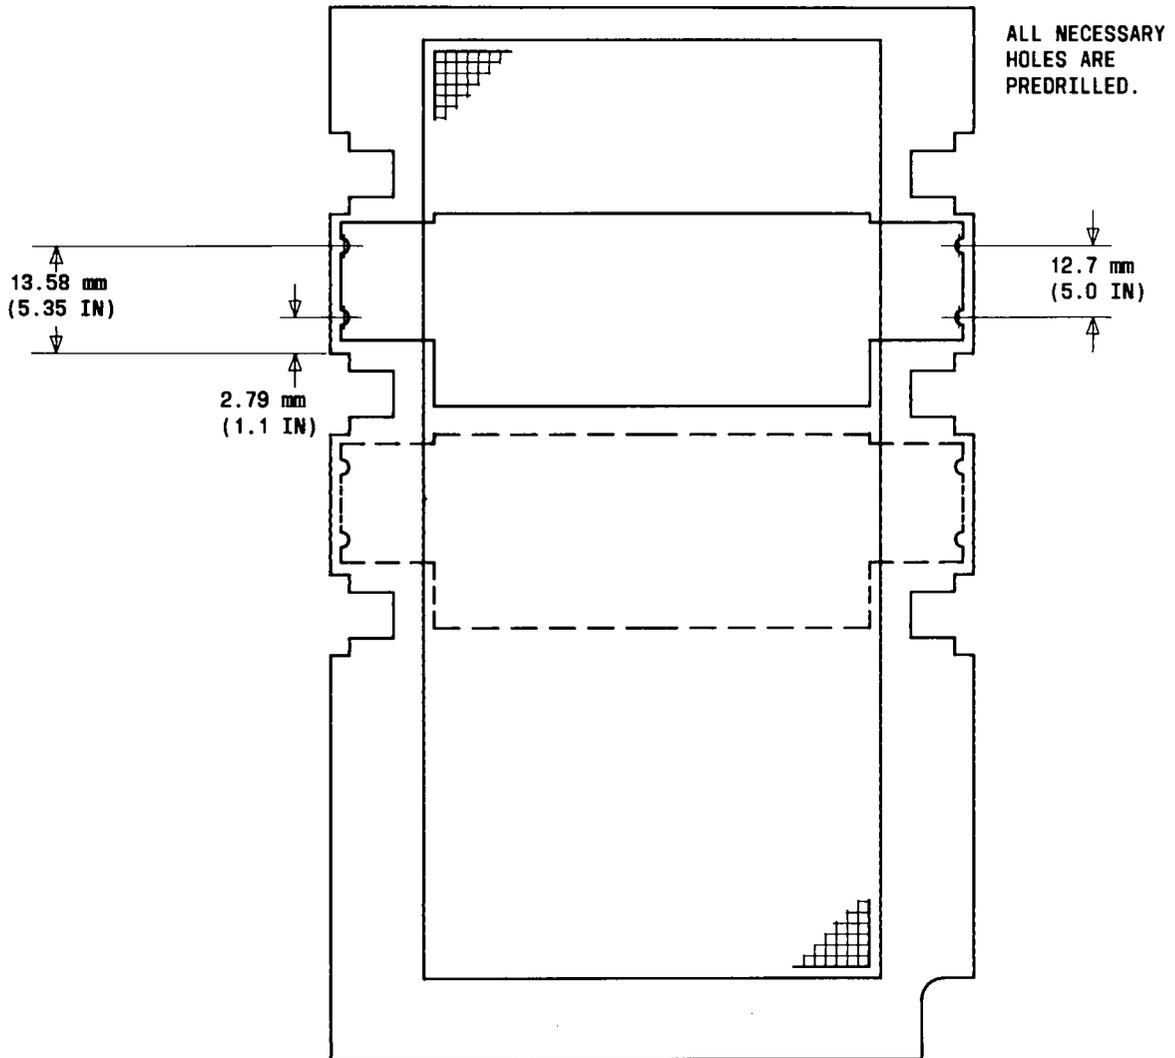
EMI Filter Assemblies Mounted on Rear Panel of PBX Cabinets
